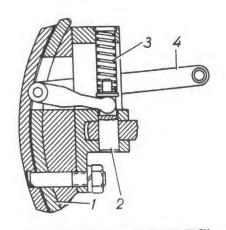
RECOIL MECHANISM ATTACH-MENT
